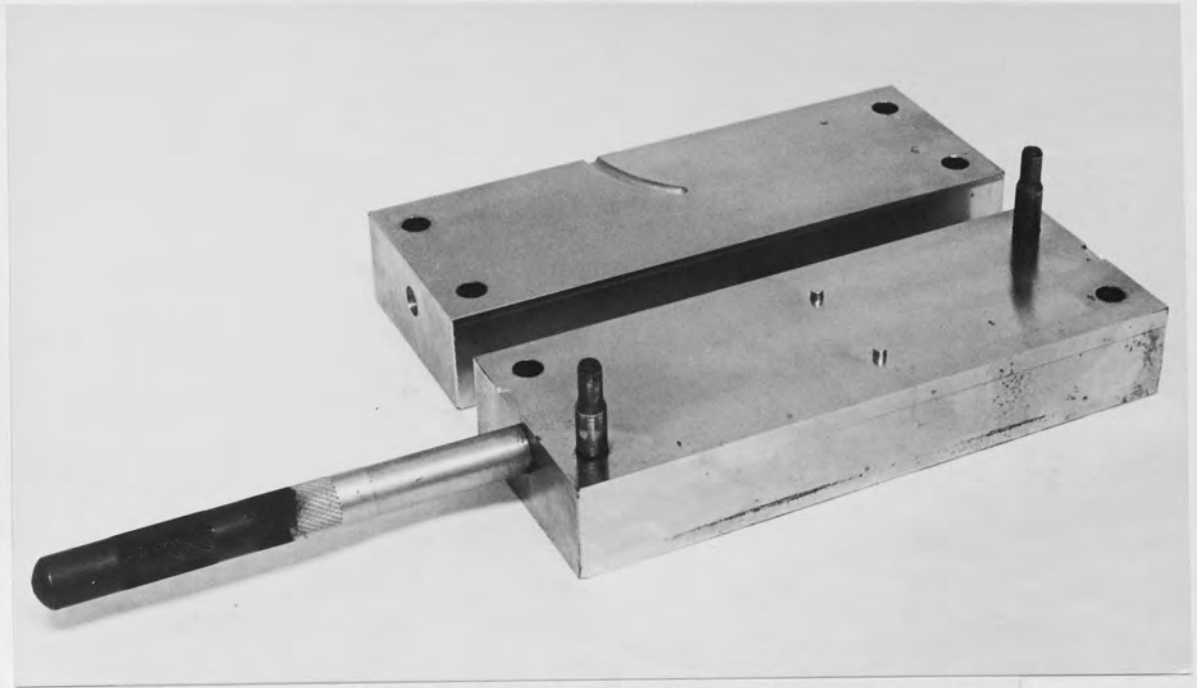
Mould used to produce plastics specimens; common top and bottom blocks.
